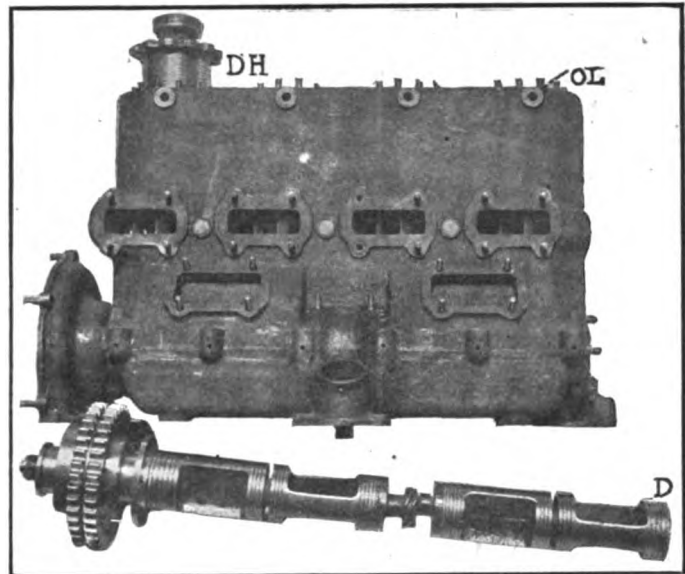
Four-cylinder block casting on Koecklin motor and the rotary sleeve
